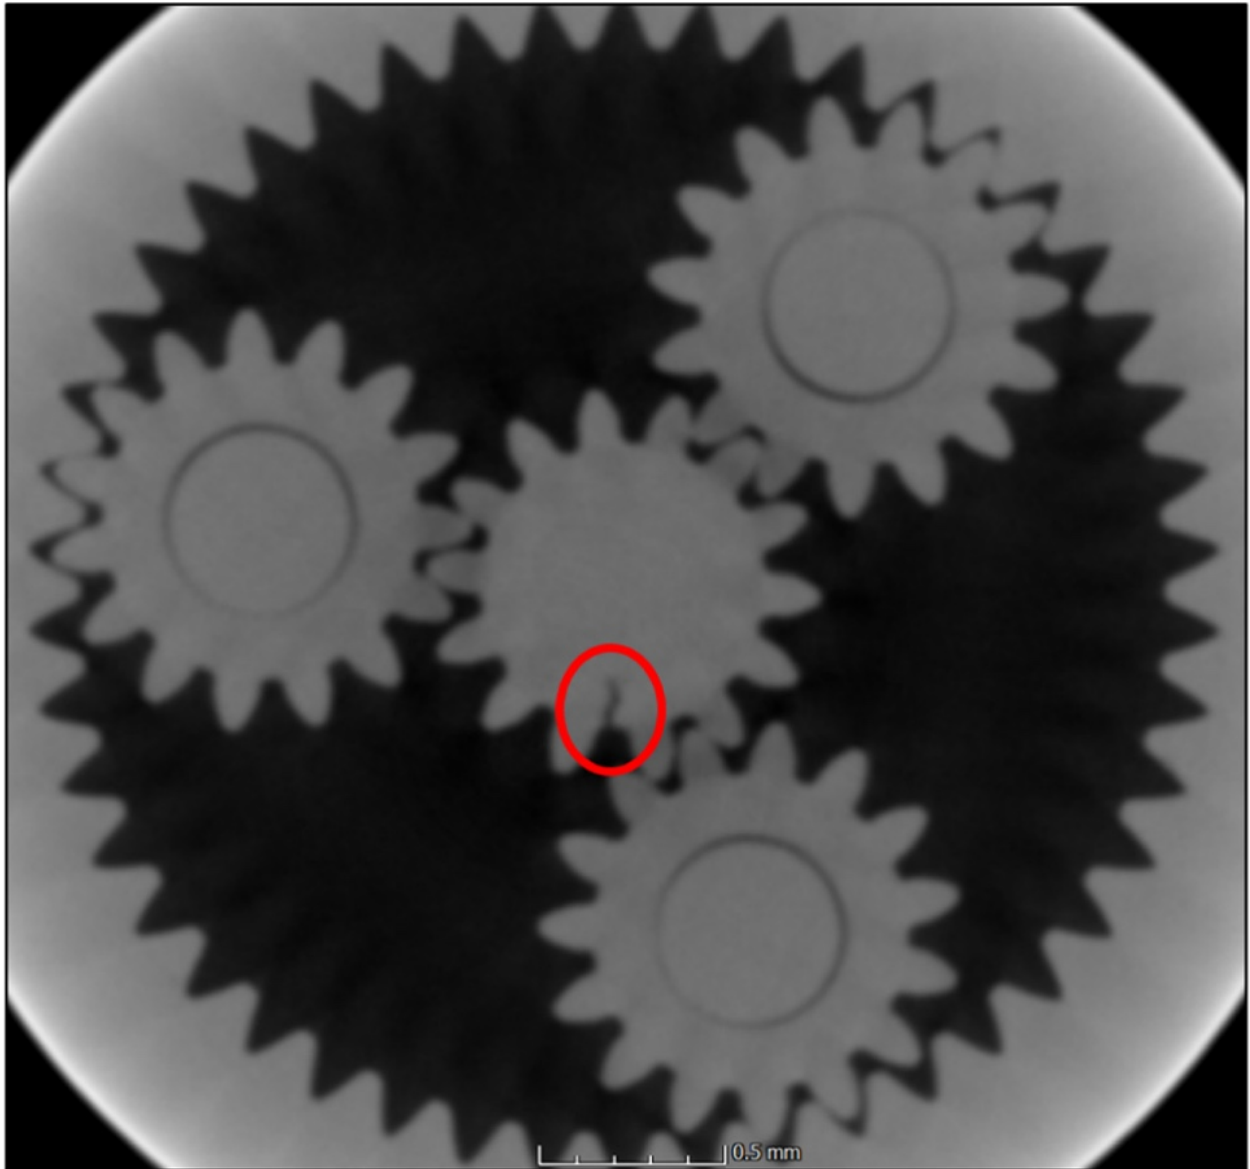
CT scan of a linear phi positioner, showing the crack in the pinion gear. This image also shows how the gears do not sit perfectly flush with each other, leading to approximately 2 degrees of backlash.
